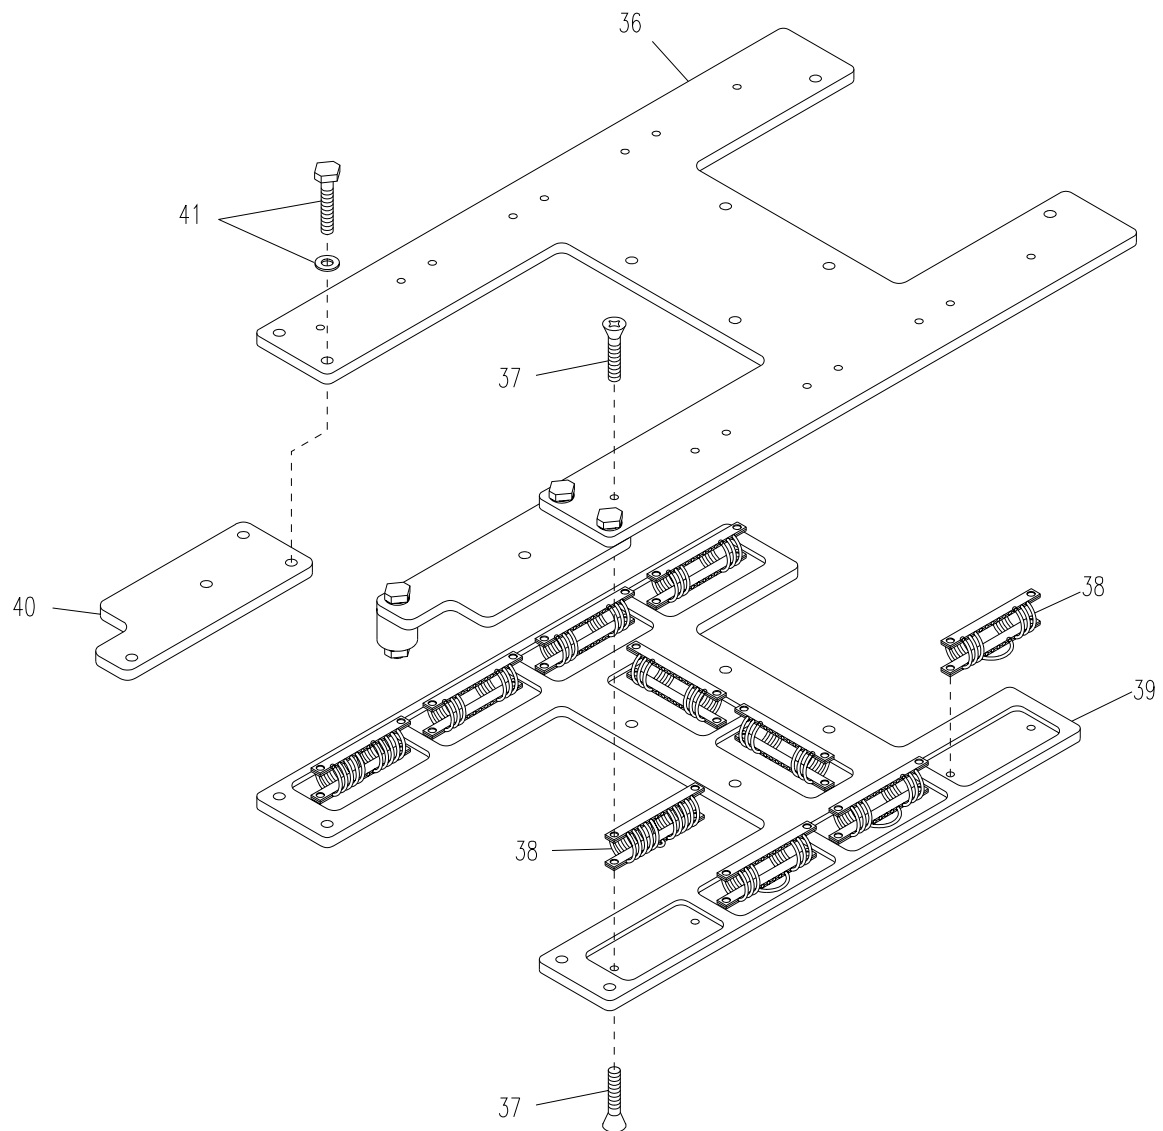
Frame Assembly and Vibration Isolator Mount Assembly (Sheet 6 of 6)
